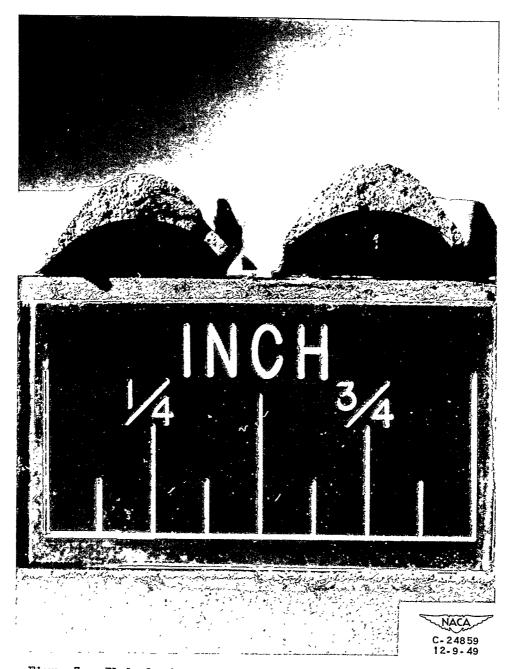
Blade-fracture surfaces showing coarse crystalline texture.
